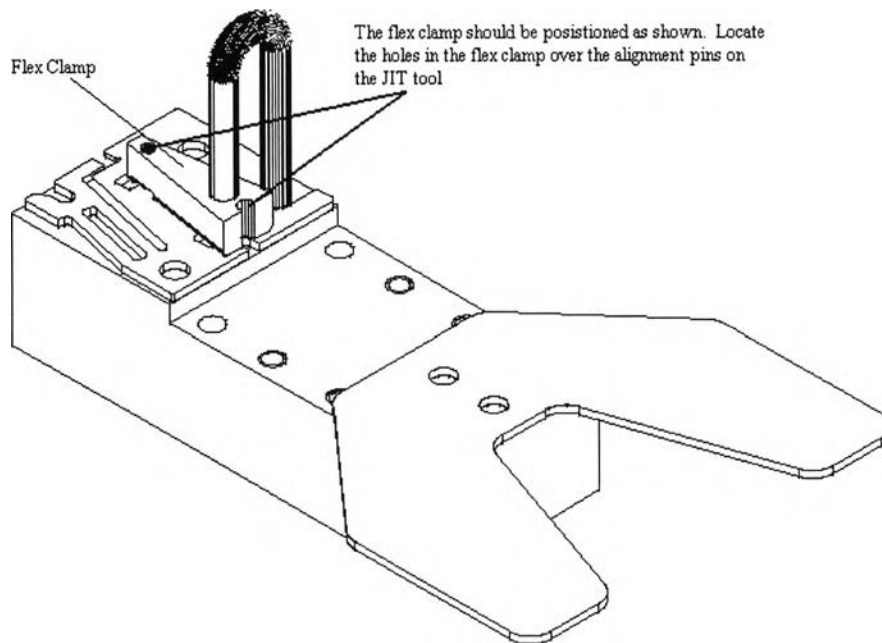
JIT Tool and its Pie wedge U-Clamp location.
